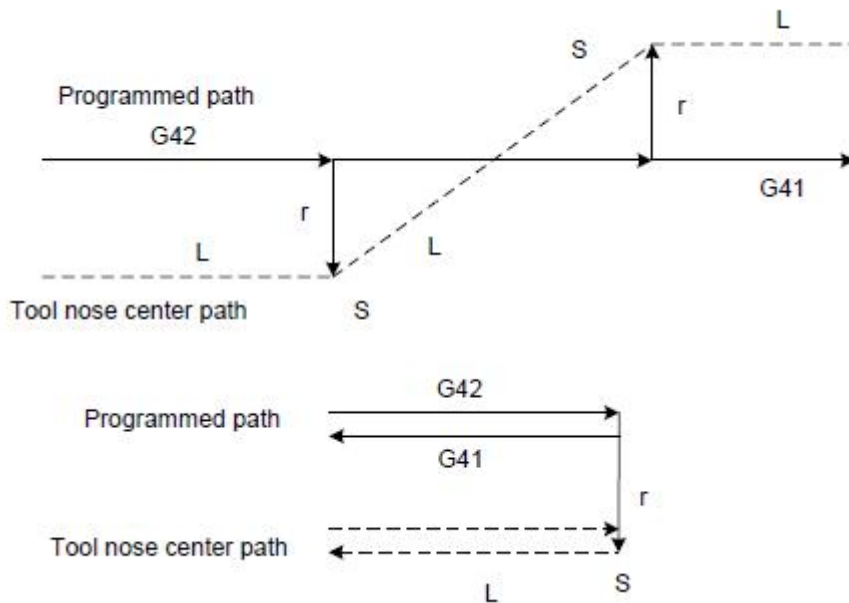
Linear—linear, no intersection (changing compensation direction)
